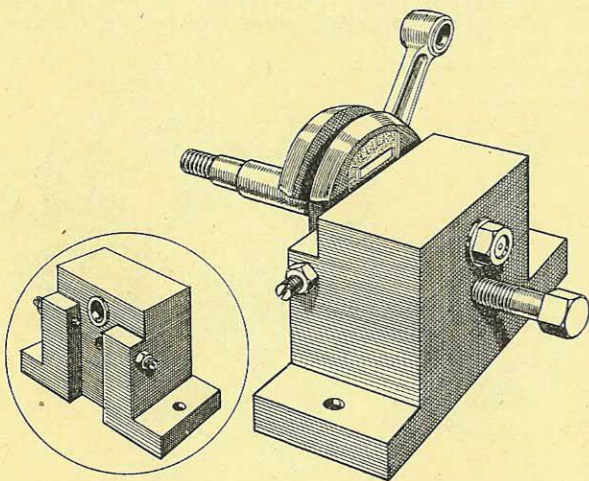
CRANK-PIN EXTRACTOR FIXTURE.
